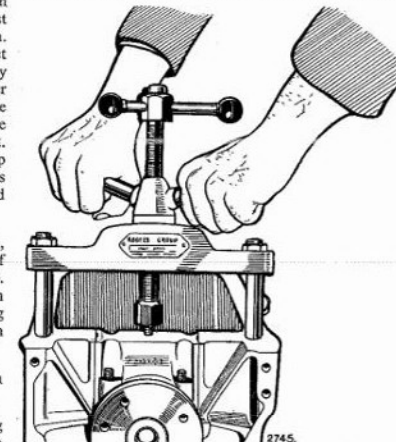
Removing the crankshaft rear main bearing cap, using the Churchill Tool R.G.11A and the adaptor set R.G.11A-1
